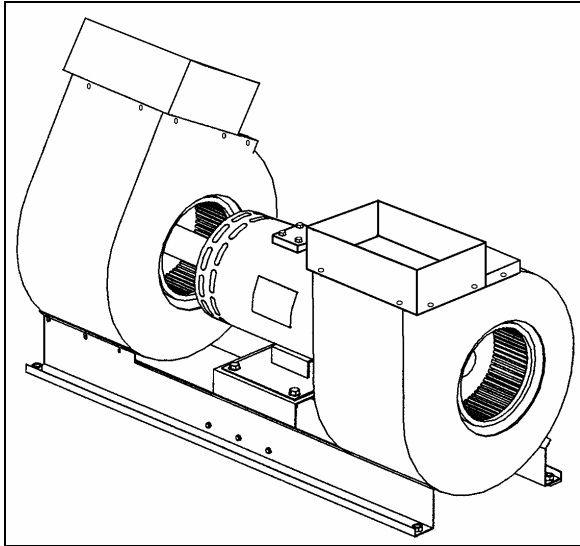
EVAPORATOR MOTOR ASSEMBLY 22208
